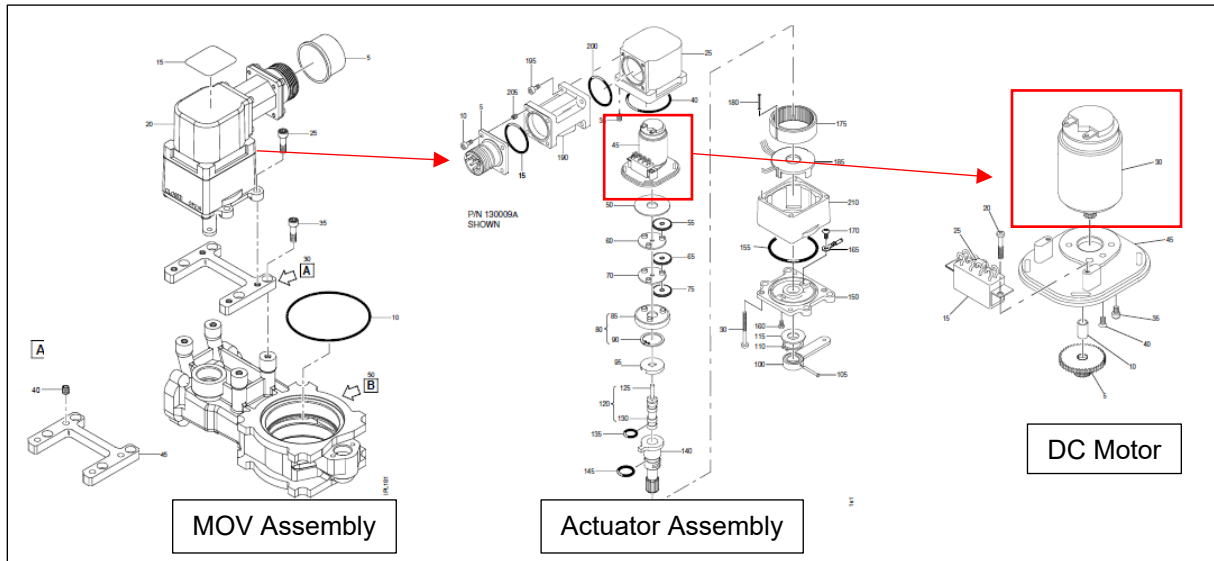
MOV assembly, Actuator assembly and DC Motor location shown.
